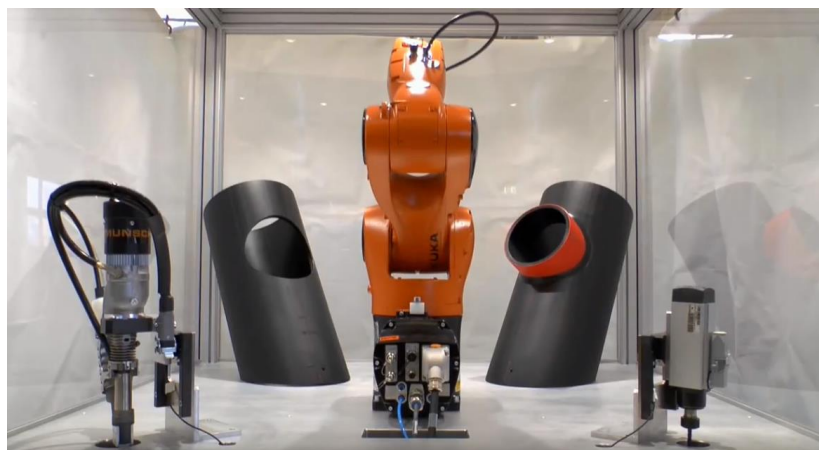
CNC & Welding end effector dual configuration [20]
